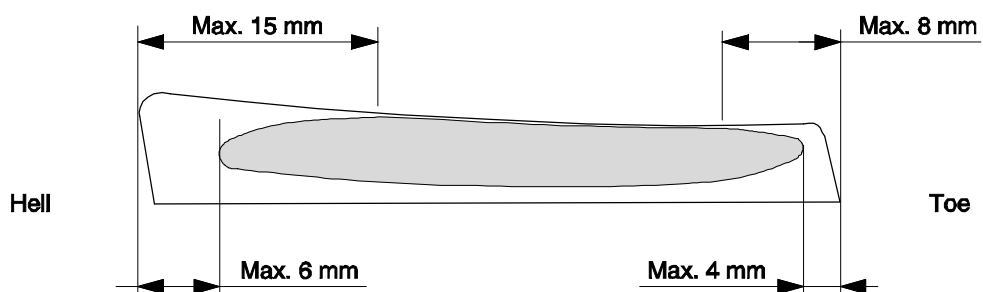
90-degrees gearbox – Inspection areas.
